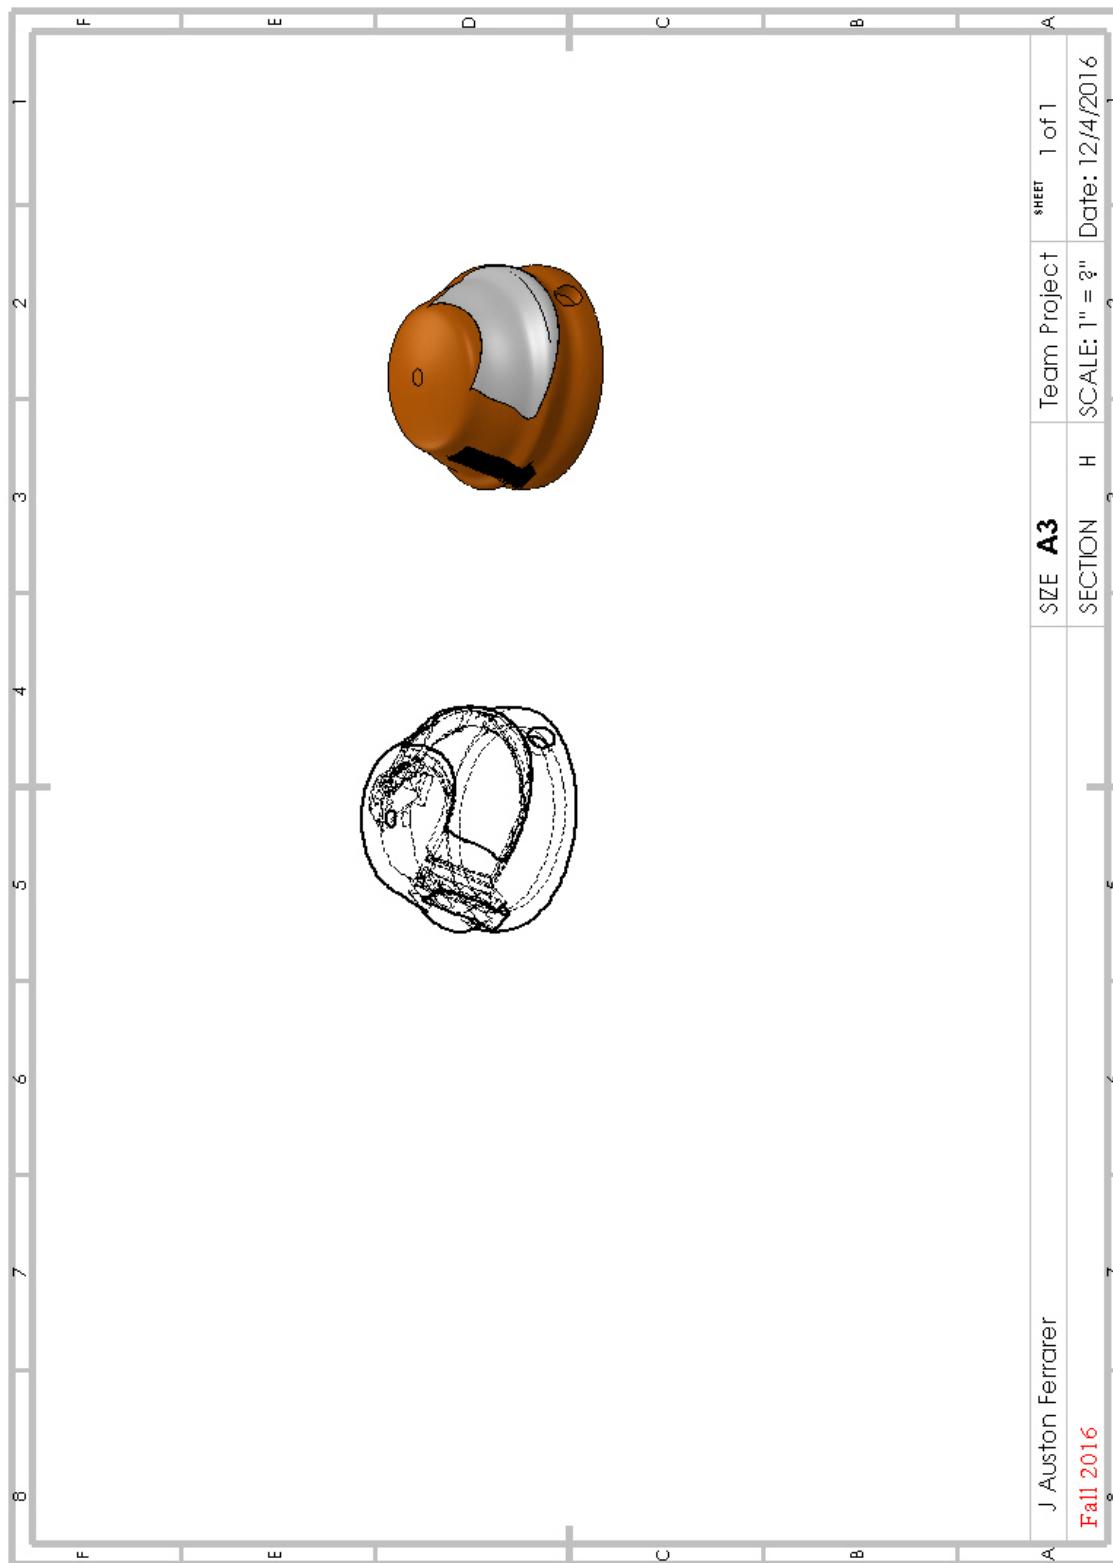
Ferrarer, Auston: Helmet Full Assembly
